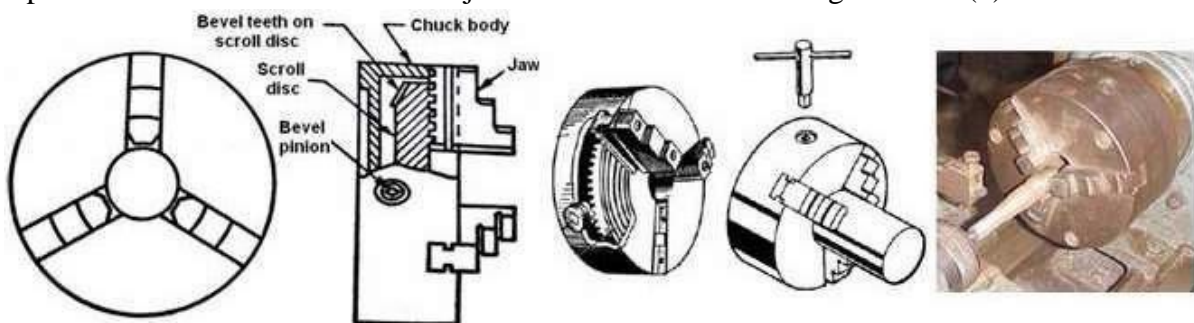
(a) 3-jaw self centring chuck or universal chuck
